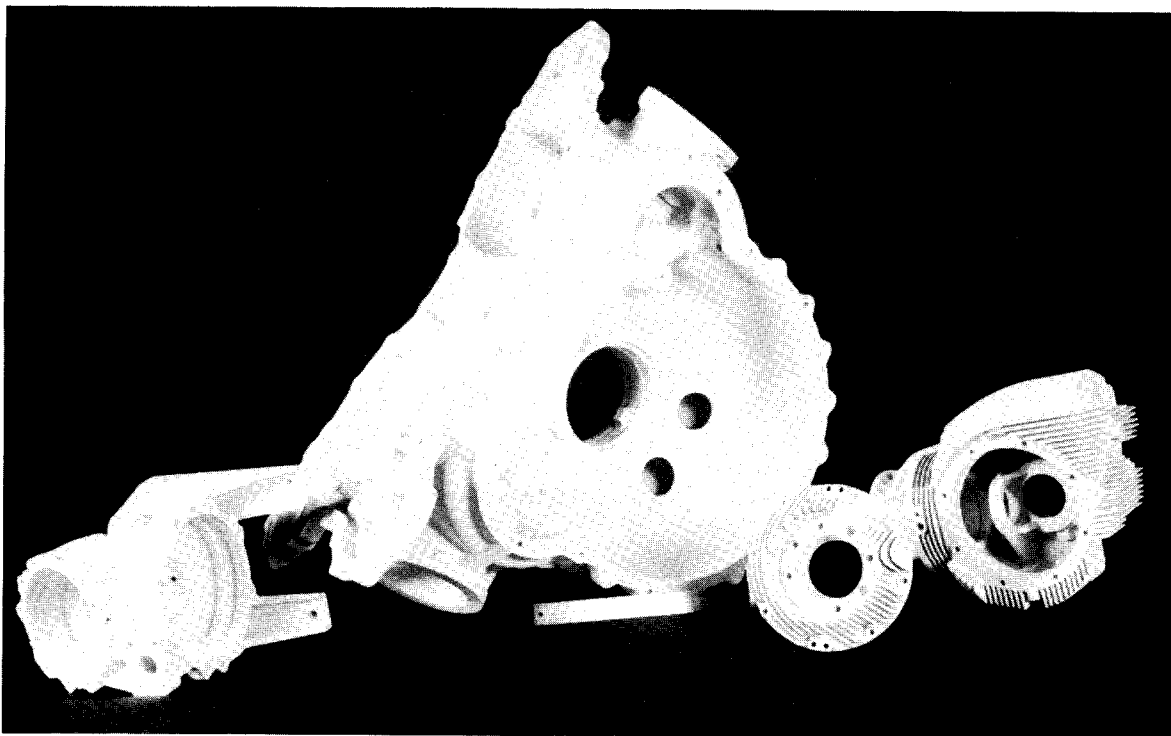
Magnesium Gearbox Components Treated with TAGNITE.
